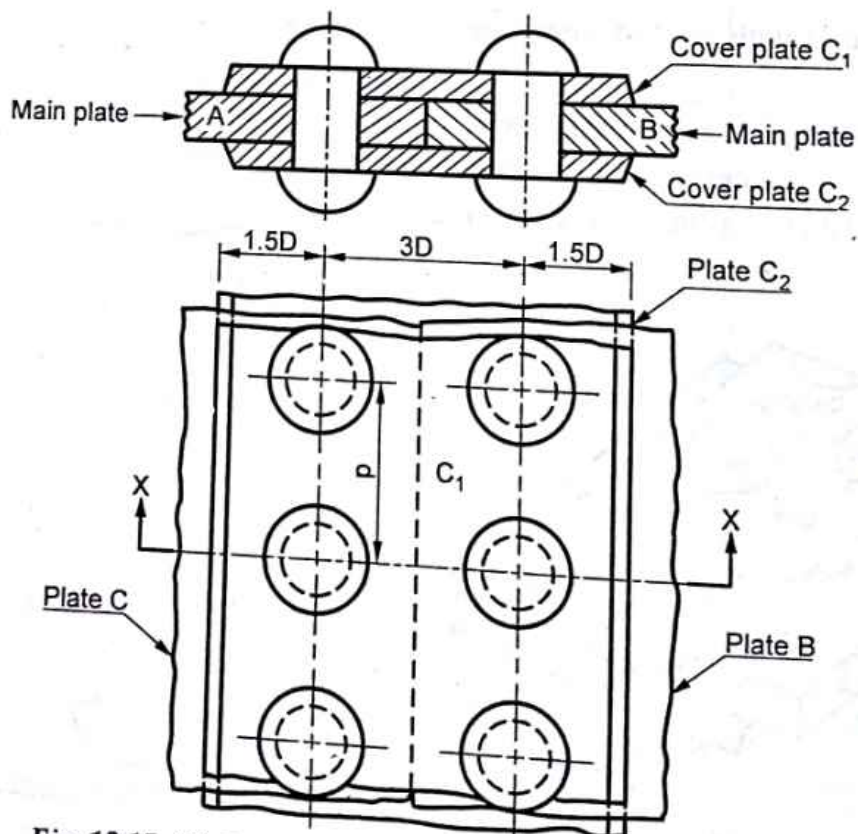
(b) Single riveted butt joint, double cover plate -
